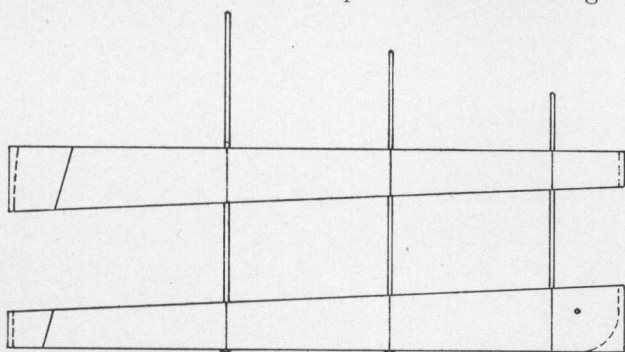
Showing How Straight Dowels are First Driven Through Bottom Board and How Each Board Above is then Driven Down into Place
